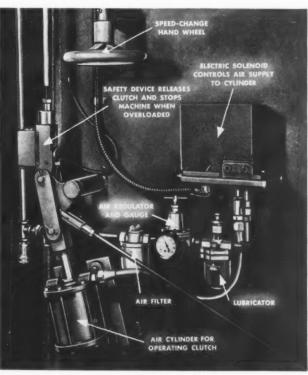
Close-up View of Parts of Air-electric Control Equipment
